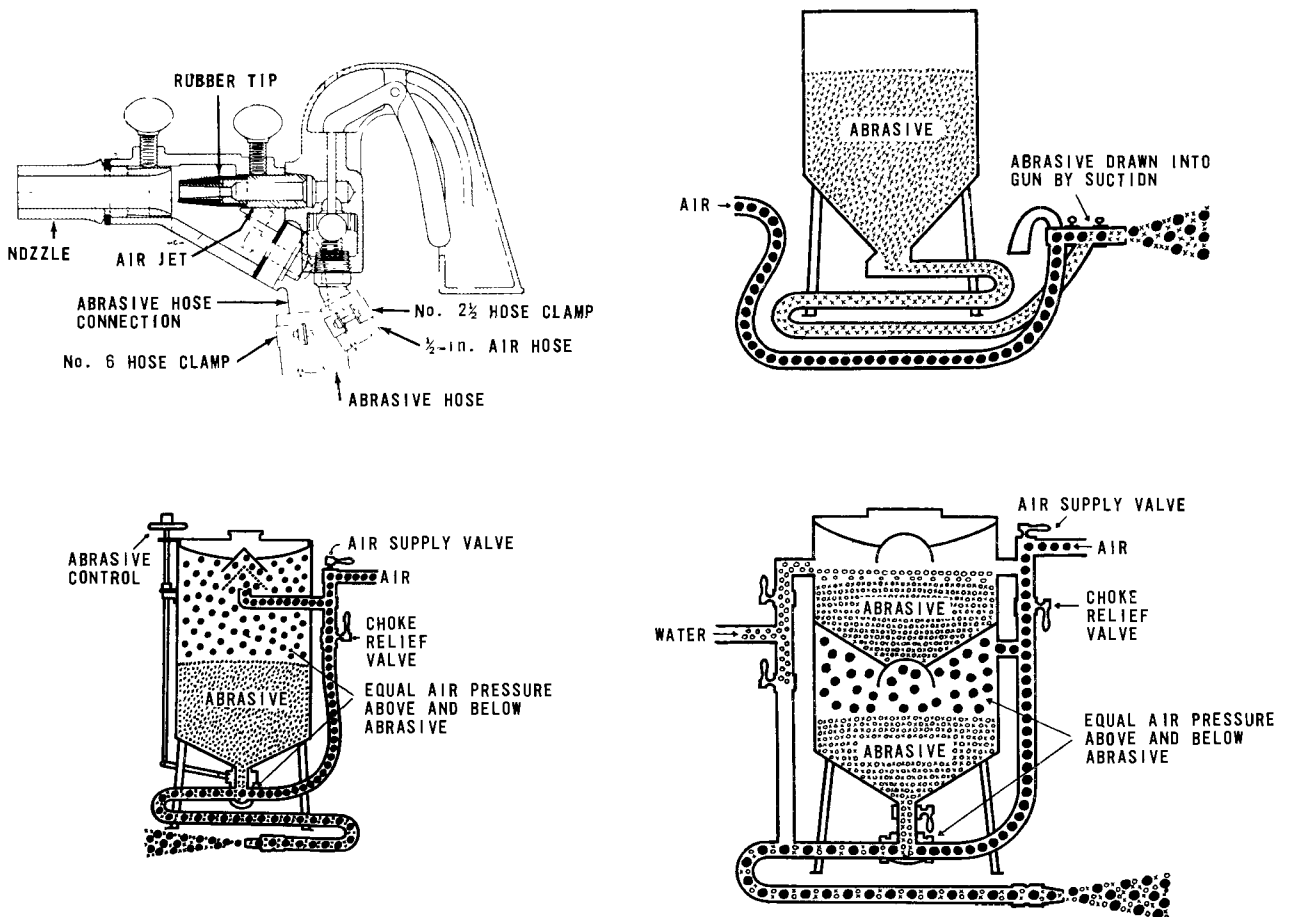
Types of compressed-air blasting machines: (top left) Suction gun, (top right) suction-type blasting machine, (bottom left) direct-pressure blasting machine, (bottom right) wet blasting machine (Bulletin No. 100B, Pangborn Corporation, Hagerstown, Md.).
